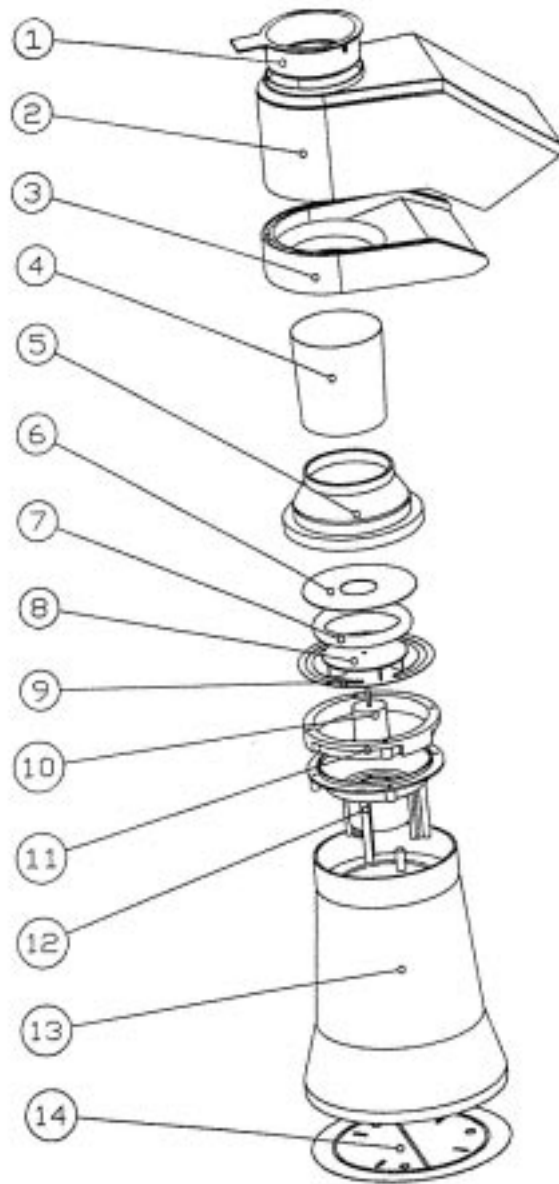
Exploded view of the Presto hot air popcorn popper. Bill of materials includes: 1-butter cup, 2-spout, 3-spout base, 4-container wall, 5-container bottom, 6-upper heating plate, 7-heating element, 8-impeller, 9-lower heating plate, 10-motor, 11-insulator ring, 12-motor housing, 13-housing, and 14-base plate.
